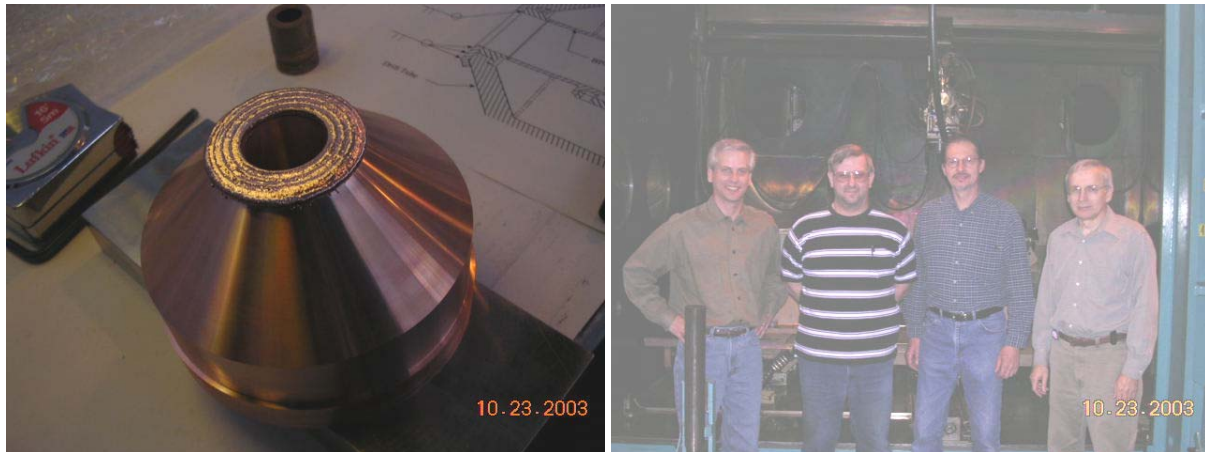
E-beam welding activities at Sciaky were completed with the repair of BPM drift tube 4-3. Shown in photo is a sample drift tube after qualifying the ring washer repair and the Sciaky-LANL team after completion of that last drift tube weld.
